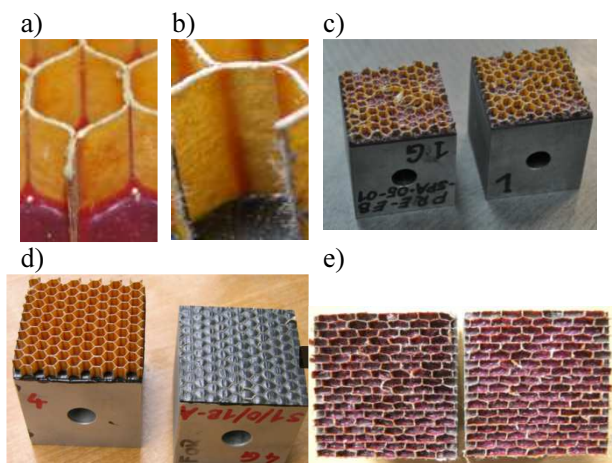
Honeycomb-laminate adhesive joints: a) good and b) poor designs. Failure of c) good and d) poor honeycomb-laminate face adhesive joints; e) failure of honeycomb with rectangular cells
